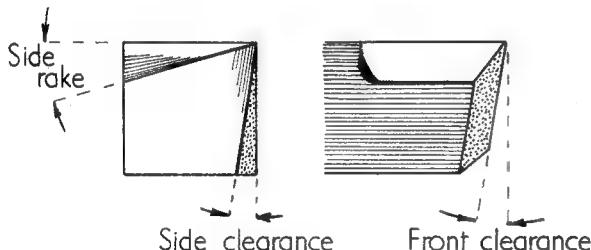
The rake and clearance angles formed at the tip of the knife-tool
